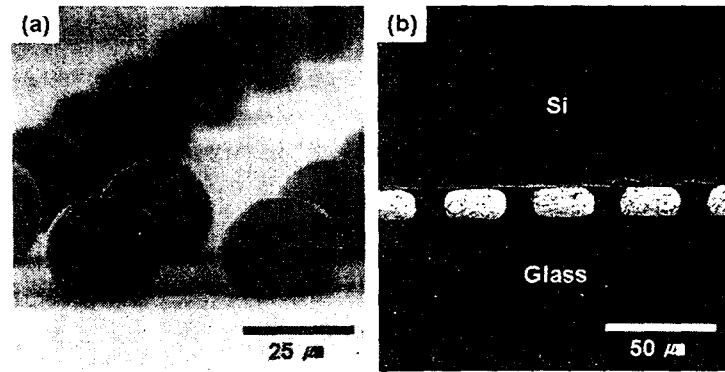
SEM images of (a) 40µm pitch Sn-In solder bumps on Si and (b) solder joint.
